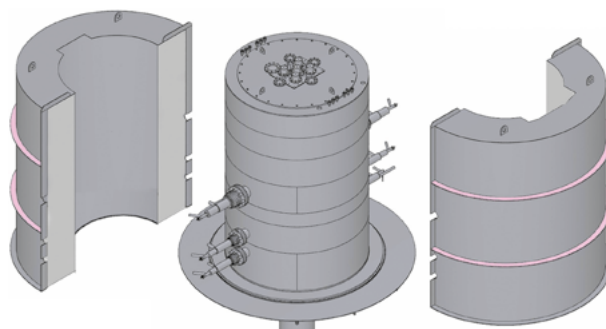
Schematic layout of the third small-sized melter prototype designed by PA Mayak fitted with removable heat protection
